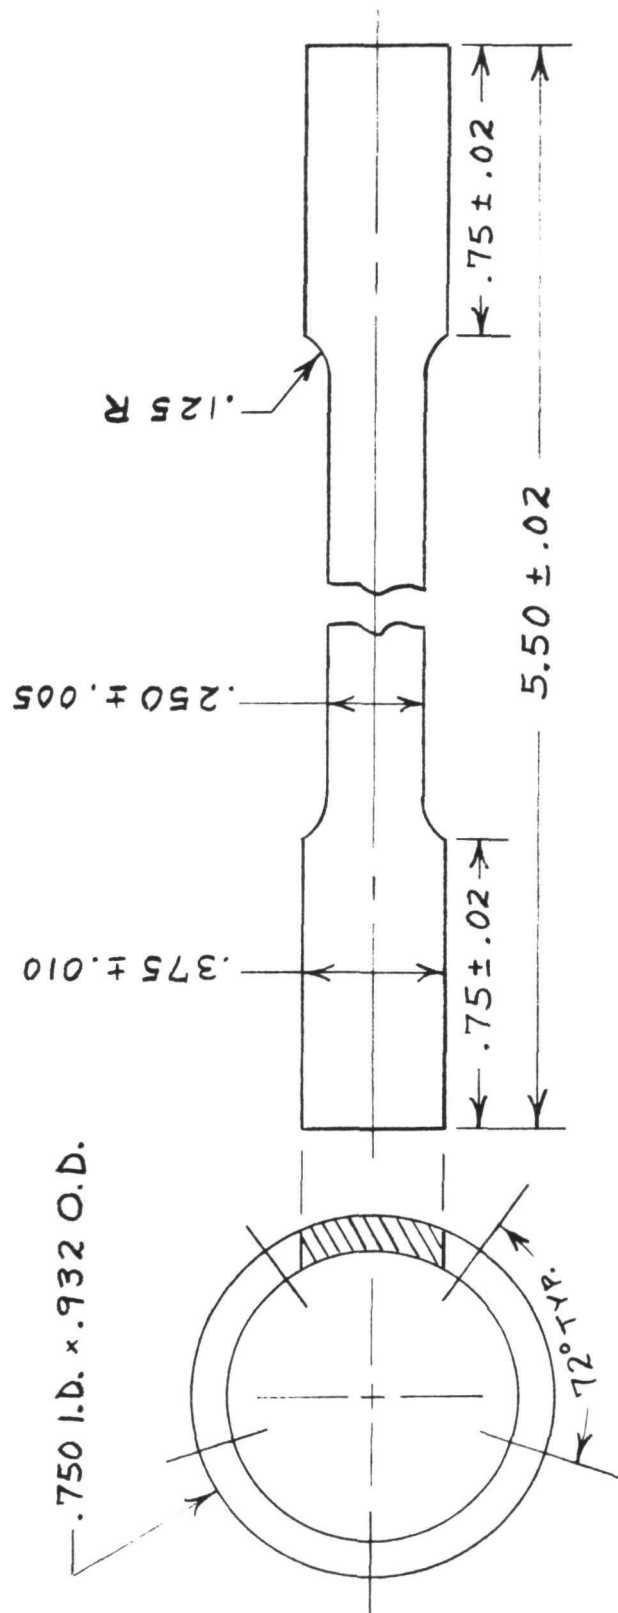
Tensile Specimen Design for Mechanical Property Testing of Ta-10W/316 SS Bimetal Joints
